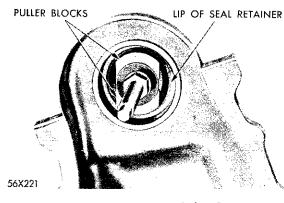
Puller Blocks Expanded to Correct Pulling Position
